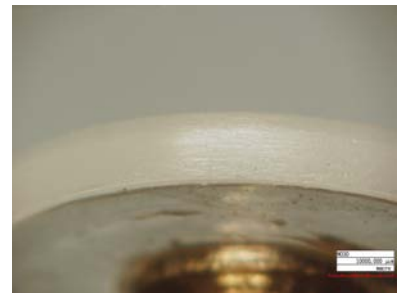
Broad Edge Profile after 600 grit Aluminum Oxide Sandpaper
